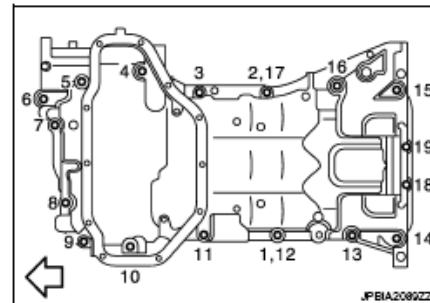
Identifying Oil Pan Mounting Bolts Loosening Sequence
